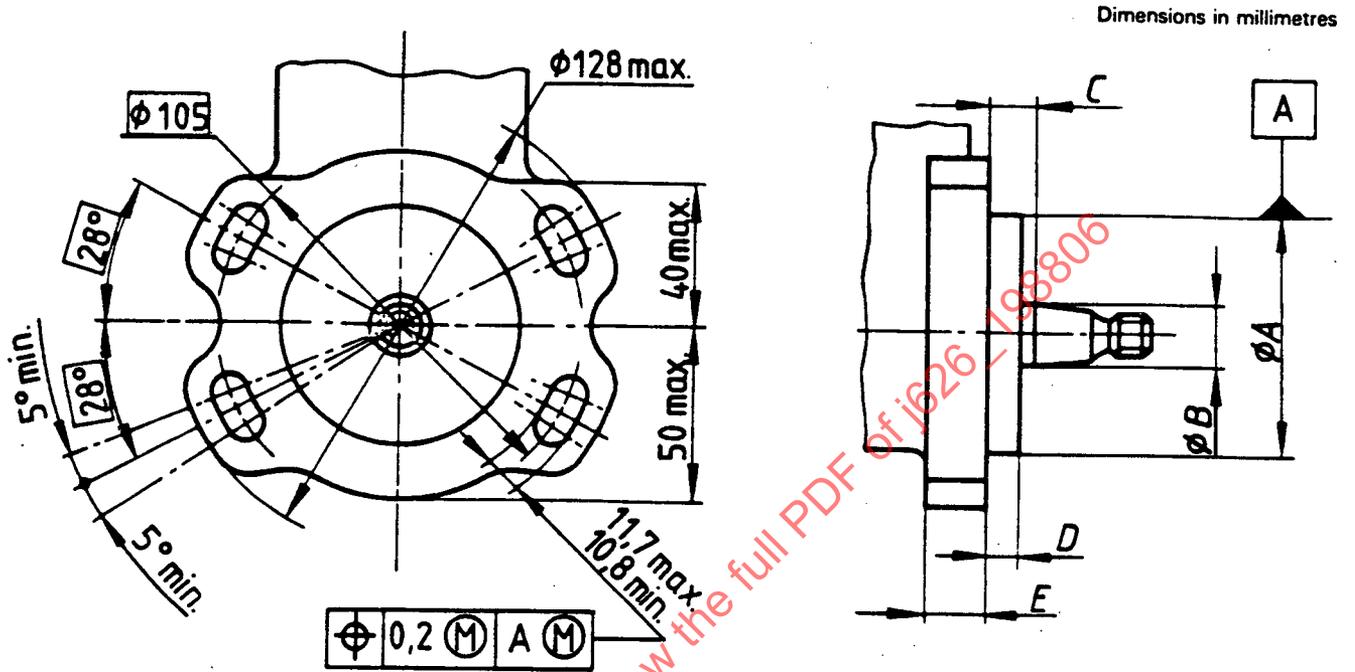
Fuel Injection Pumps - Type 7 End-Mounting Flange
